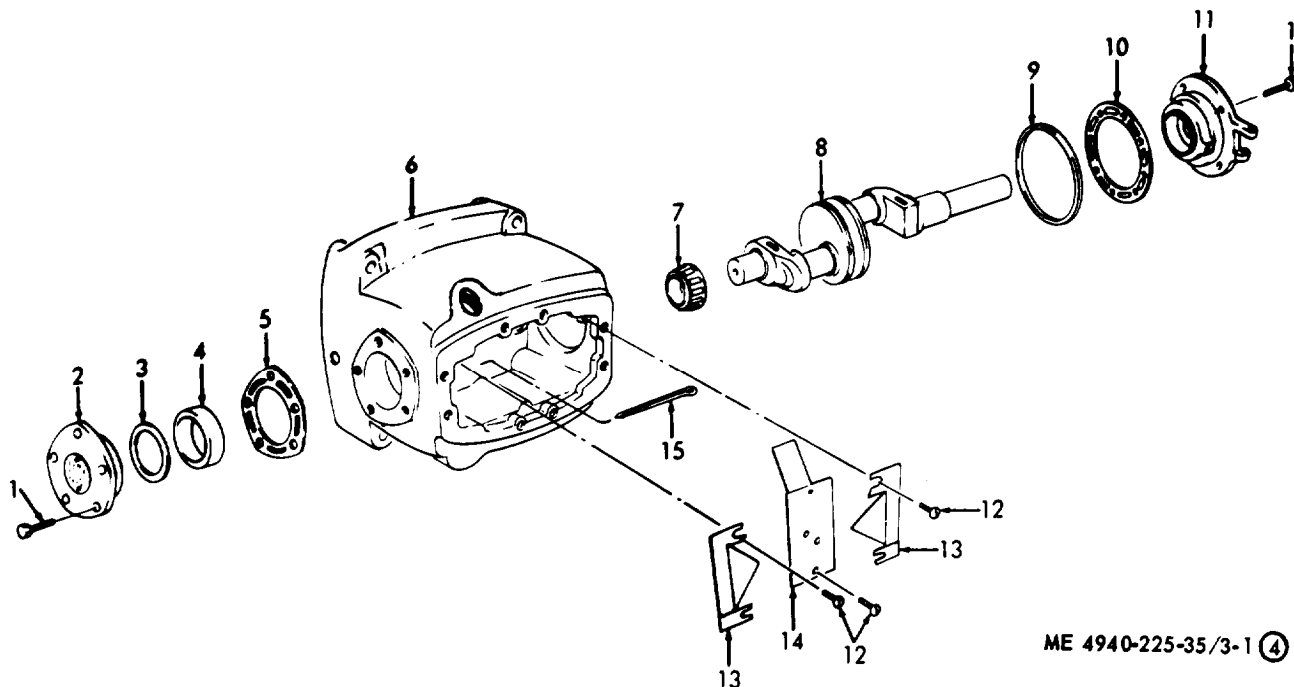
Air compressor, disassembly and reassembly (sheet 4 of 4).
